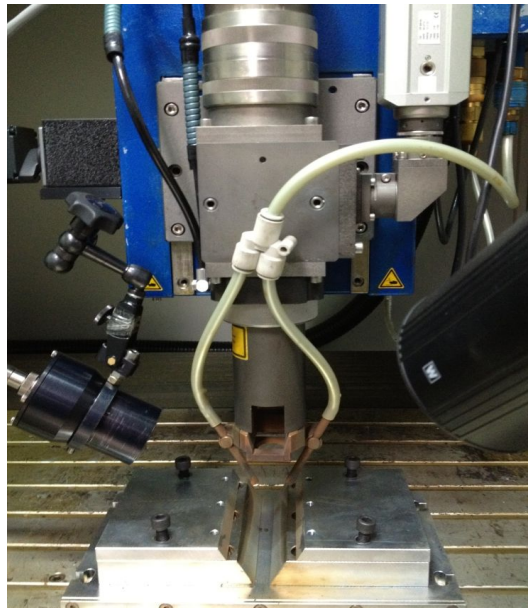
Measurement set up of signals in Nd:YAG laser welding
